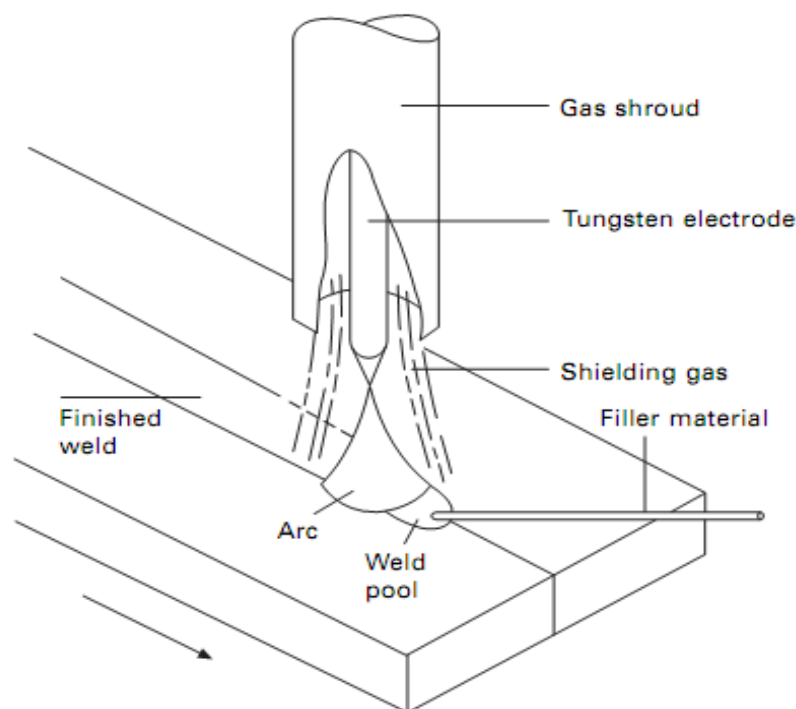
Schematic representation of gas tungsten arc welding process [69].
